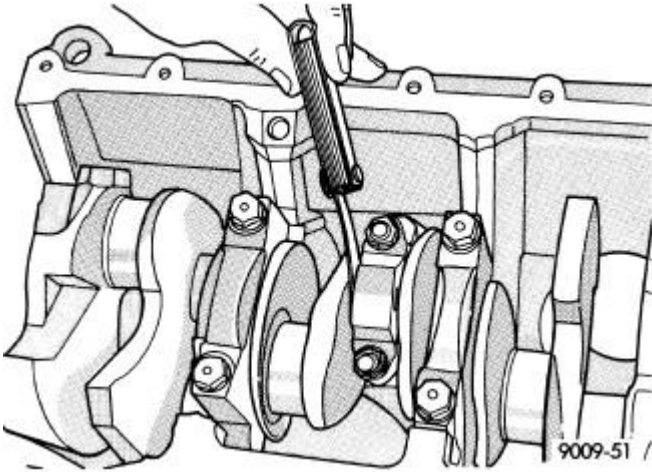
Checking Connecting Rod To Crankshaft Journal Flange Clearance
